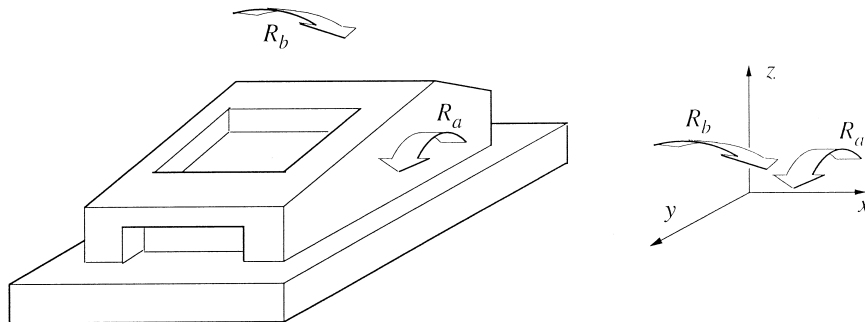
A part that can be machined in one setup with a 4-axis NC machine.
